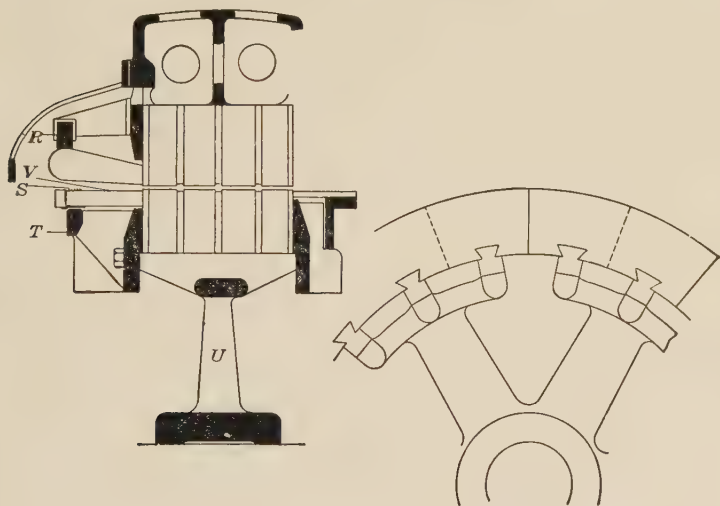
Large induction motor; both squirrel-cage and wound-rotor construction shown.
